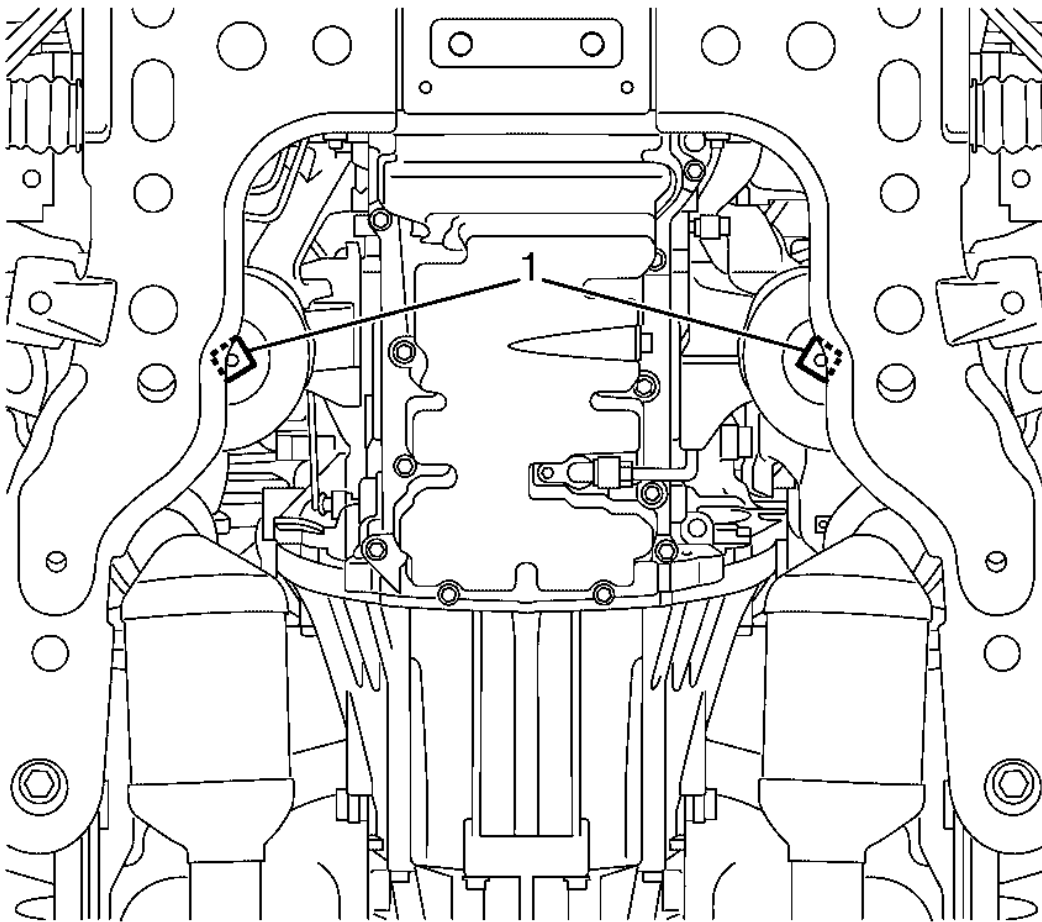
Identifying Engine Mount To Front Subframe Retaining Nut
